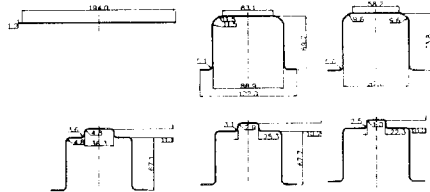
Sequence drawing for the deep drawing parts of the "motor housing" - Output of "Pro_Deep"
